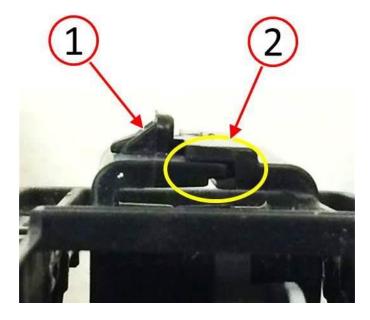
Inspect Actuator Motor Case Housing For Engagement
